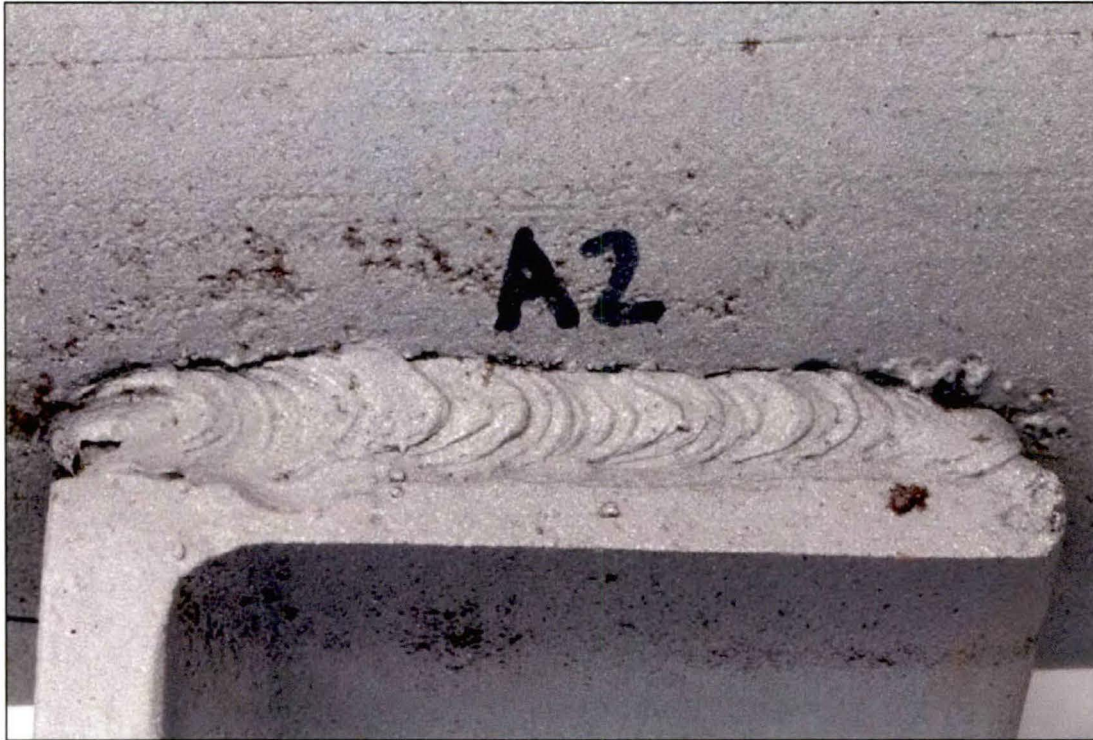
Image of the Lug A2 top weld. This weld exhibited some incomplete fusion.
